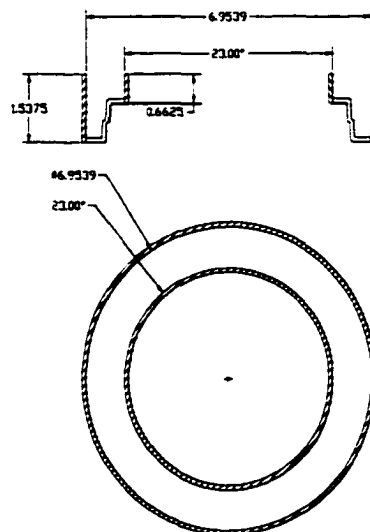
Dimensions and general parts involved in manufacturing the Spigot
